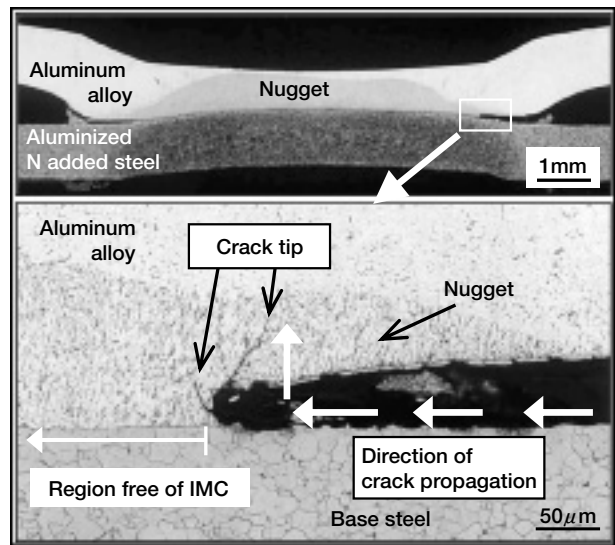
Cross-sectional structure of spot welding part at load as for the cross tension of 1.2kN in dissimilar metal joining of aluminum alloy to hot-dip aluminized N added steel sheet.
